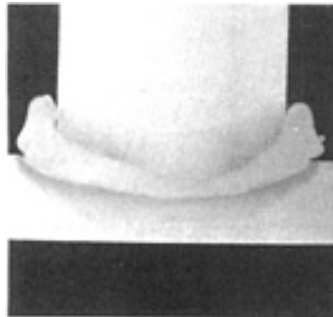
MACROSECTION OF LOW-CARBON STEEL STUD WELD
